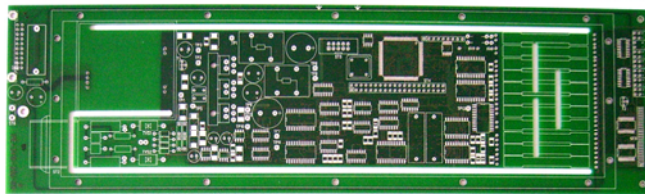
Printed Circuit Board (PCB) of detector UNIQD TYPE 3410
